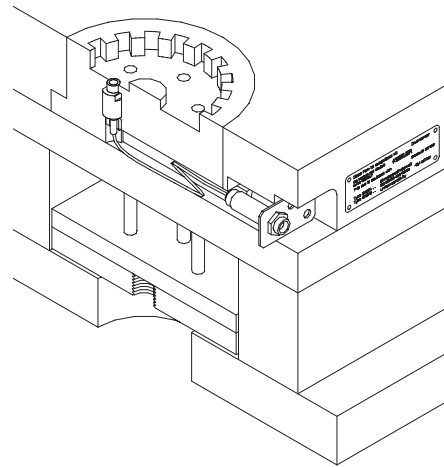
Sensor, cable, mounting plate (Art. No. 3.520.328) and identification label (Art. No. 3.520.842)
